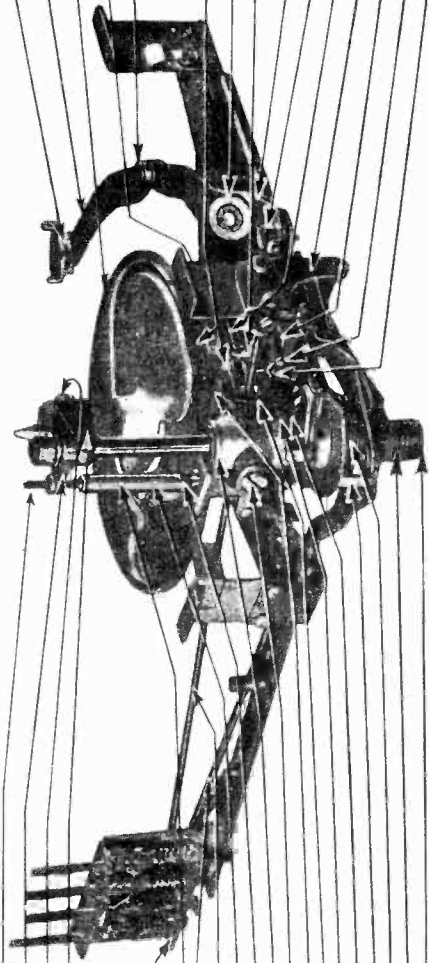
PHOTO C-D. VIEW OF SUB-PLATE ASSEMBLY, TOGETHER WITH CERTAIN OTHER ASSEMBLIES.
